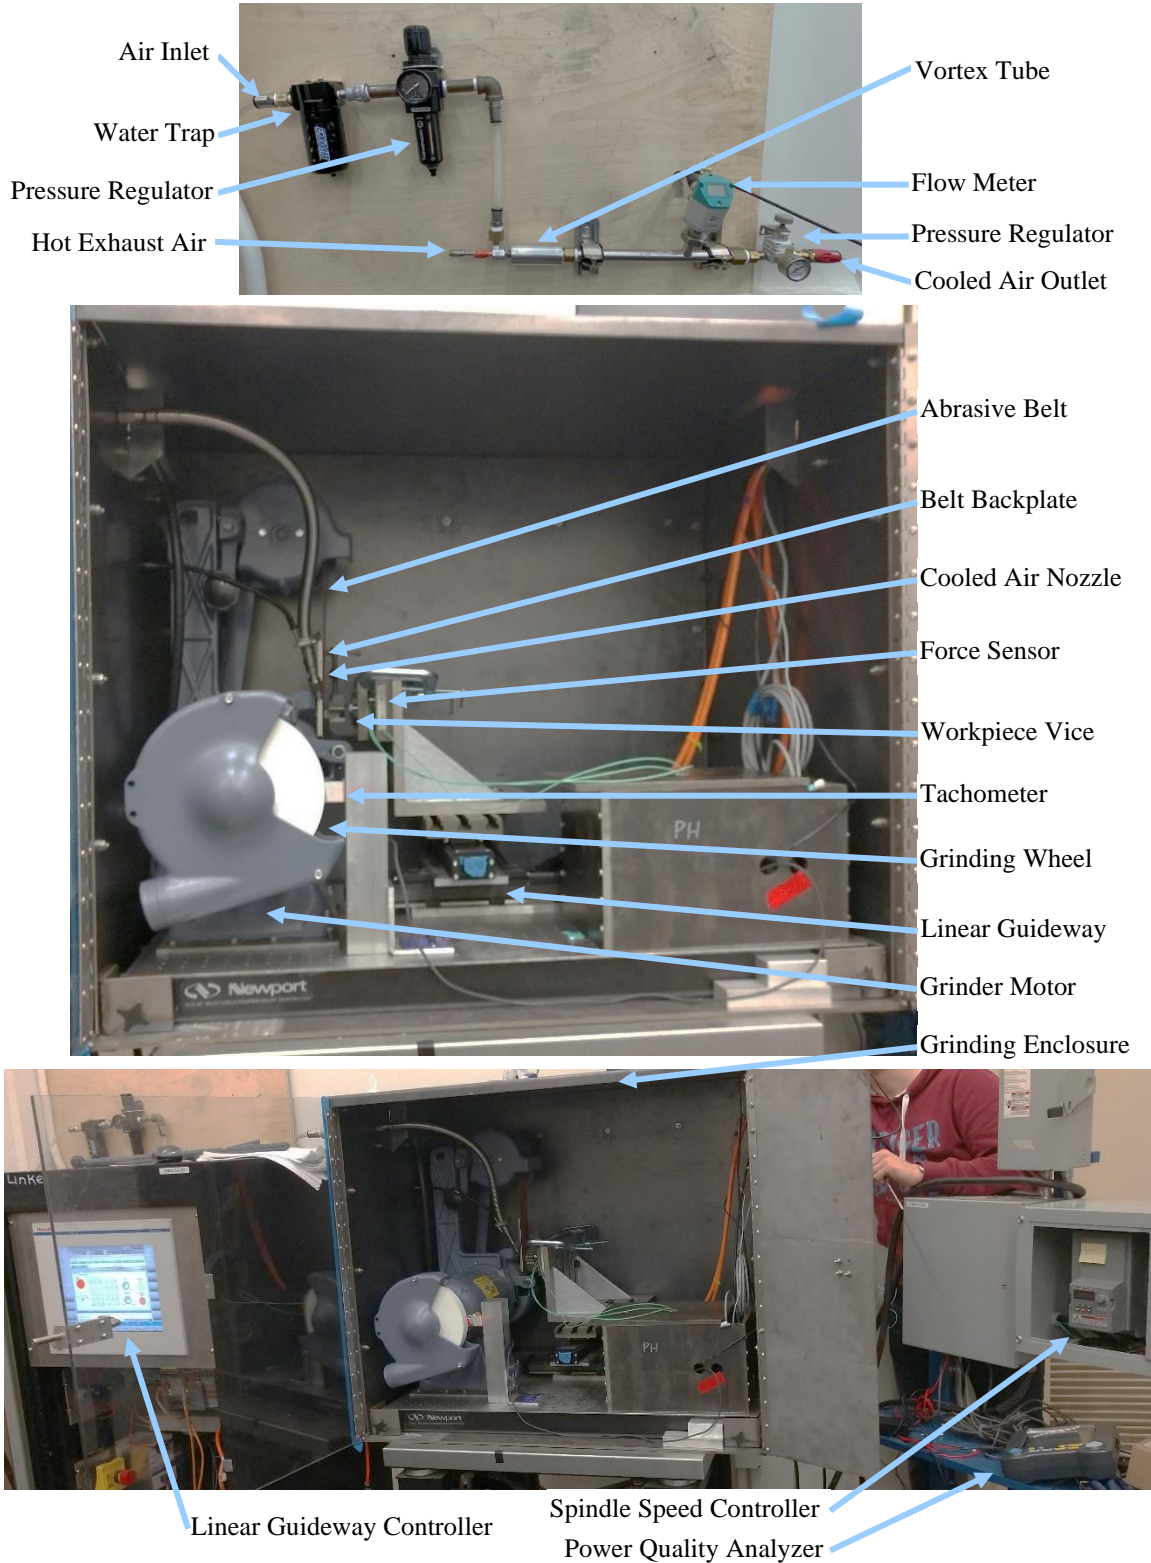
Grinding machine experimental setup; top: cool air supply; middle: grinding machine; bottom: controllers and enclosure
